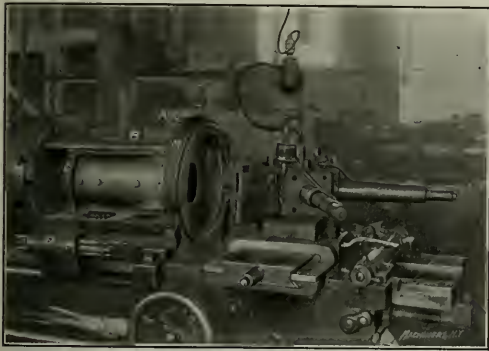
Reversible Revolving Fixture for Boring Crank and Transmission Cases.
